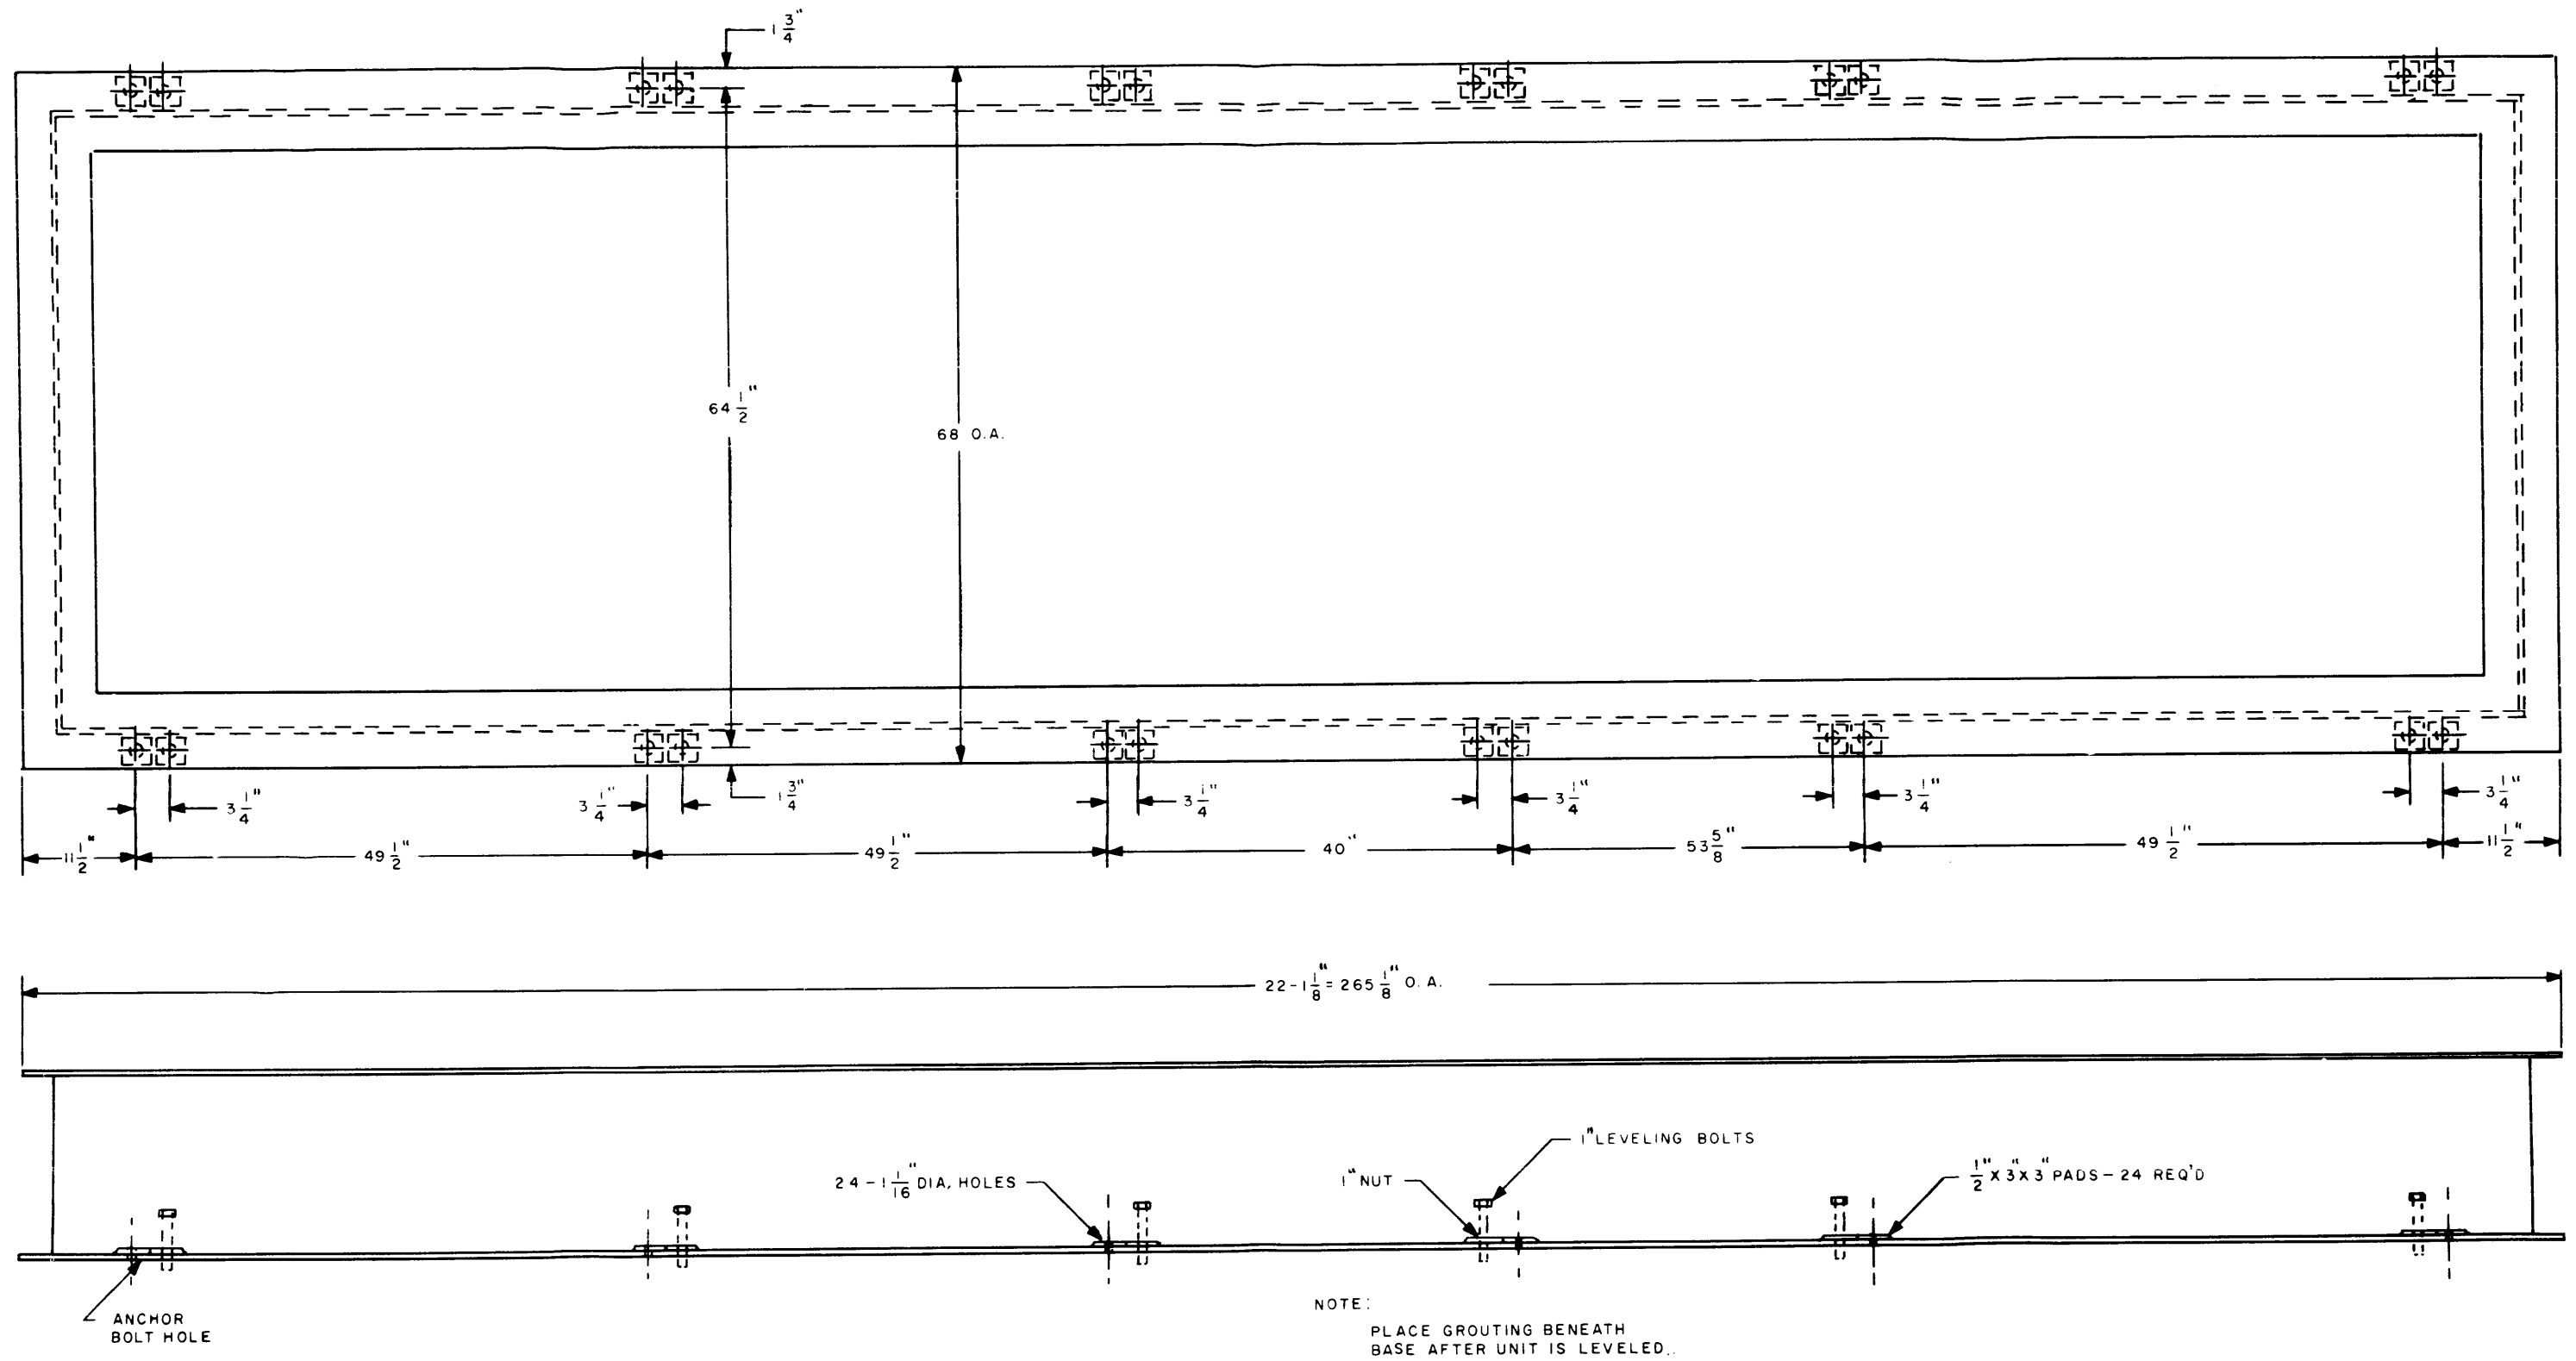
Generator Set Mounting Base, Showing Detailed Dimensions
